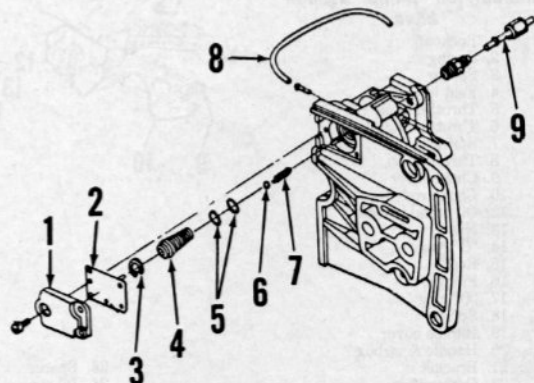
Exploded view of automatic oil pump used on Models 450, 450W, 450HG and 450SL.
